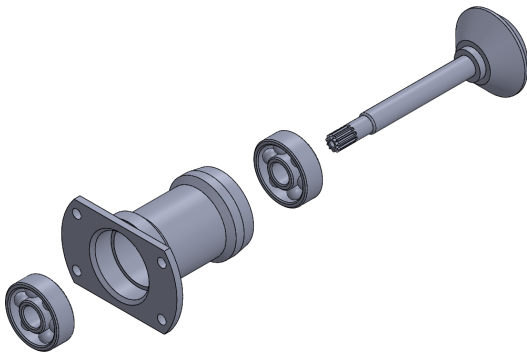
Exploded view of assembly that the user study is based upon. It involves the assembly of four parts in three steps.
